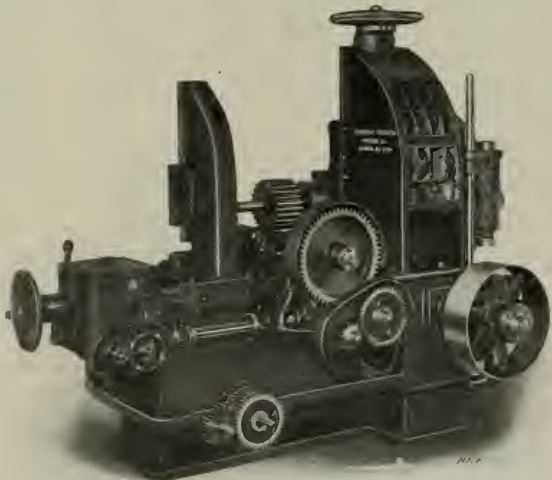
Automatic Pinion Cutting Machine. Rear View.
